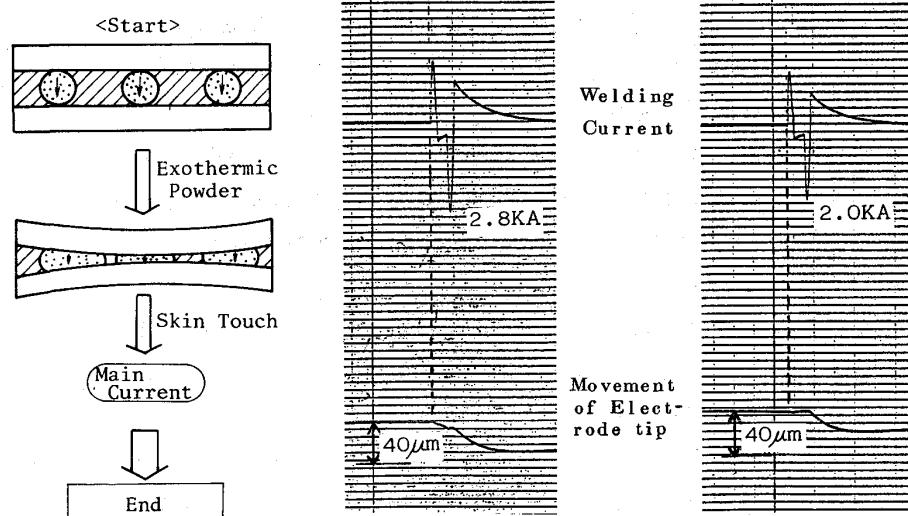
Mechanism of Spot Welding on Damping Sheet
